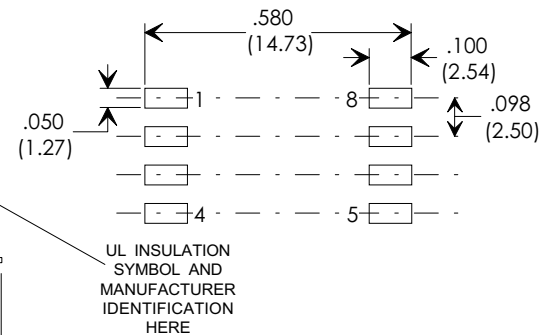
RECOMMENDED PCB LAYOUT DIMENSIONS IN INCHES (mm)
